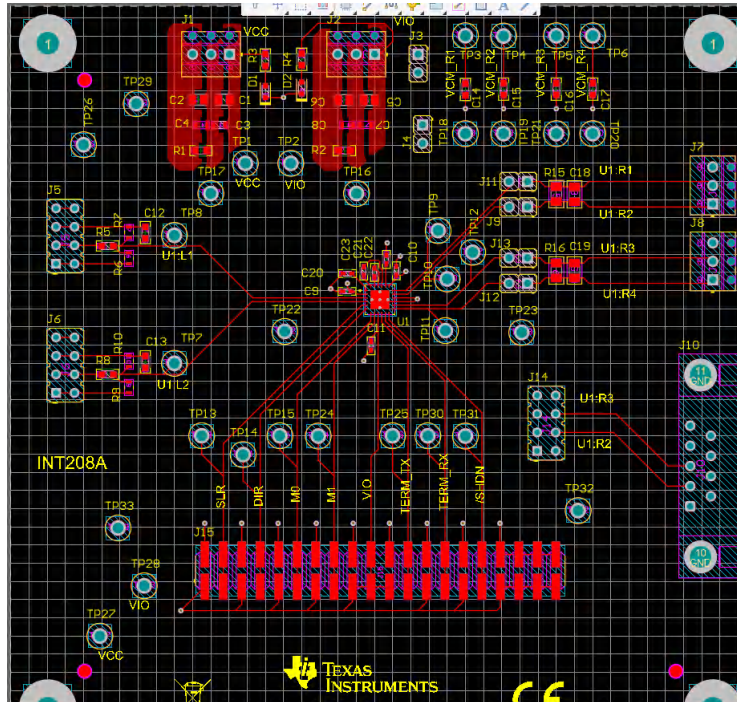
Top Layer of PCB Layout - THVD4411EVM
